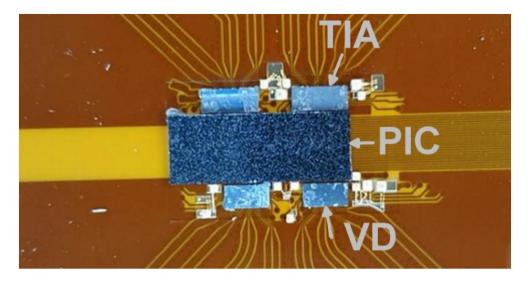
Fully assembled flip chip demonstrator with transimpedance receiver, voltage driver, photonic integrated chip, and single-layer capacitors on the electro-optical printed circuit board
